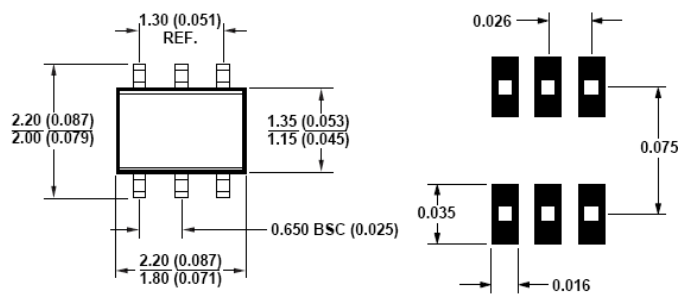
ATF36163 Package outlines with PCB pad layout [81].
